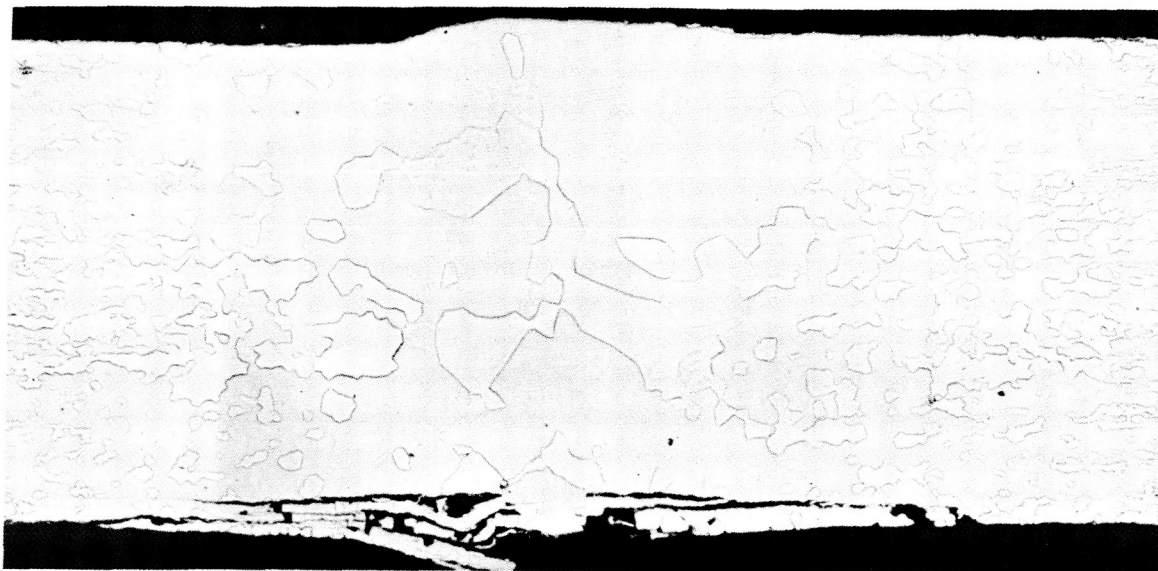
Typical section of electron beam weld in unalloyed tungsten.  $\times 80$ .
